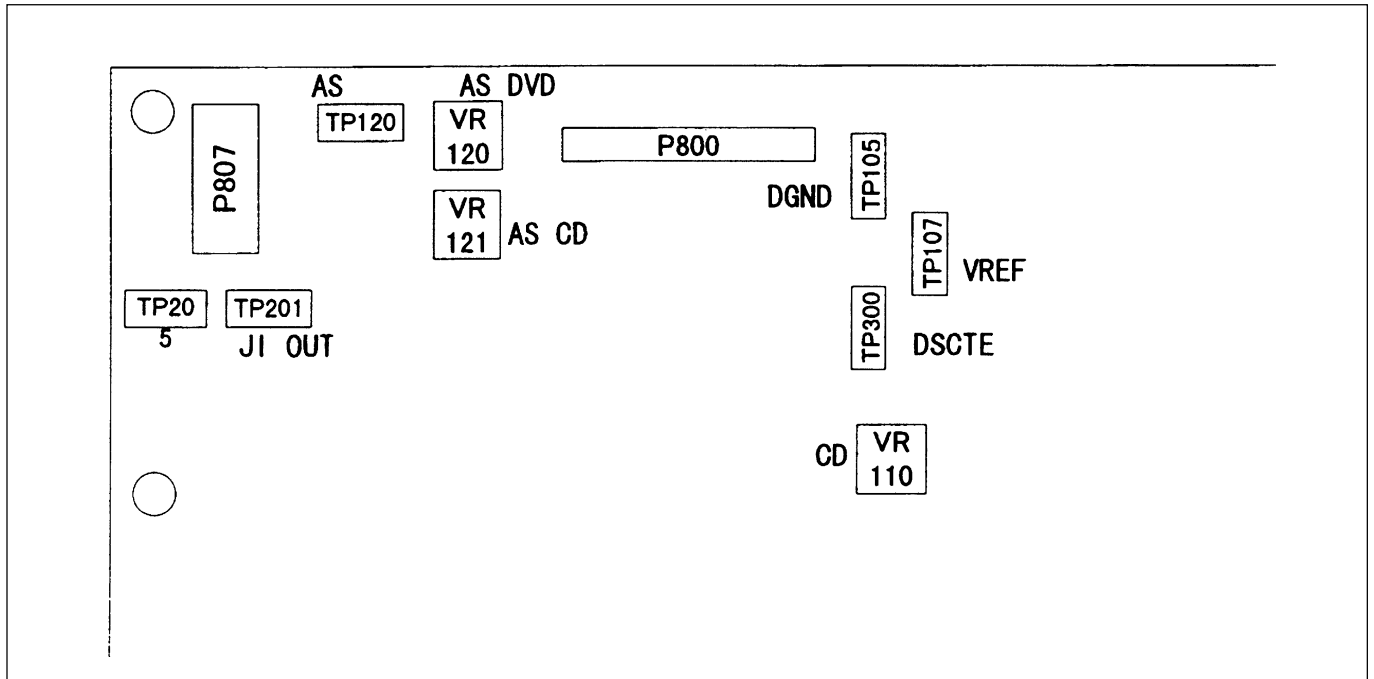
Parts Location for Electorical Adjustment (DVD Main P.C.B. Ass'y)
